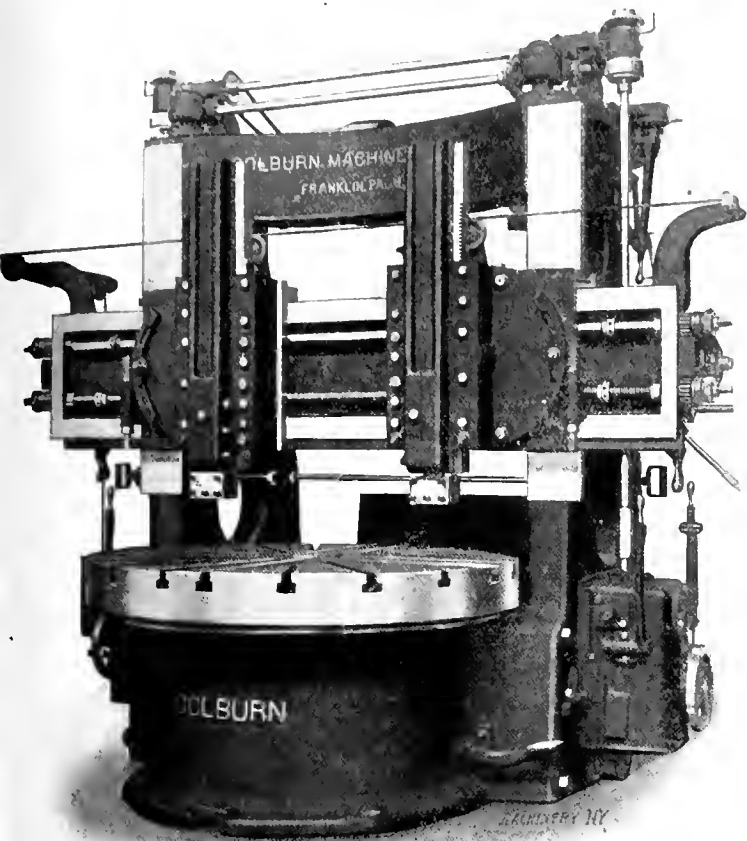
"New Model" 60-inch Colburn Boring Mill
